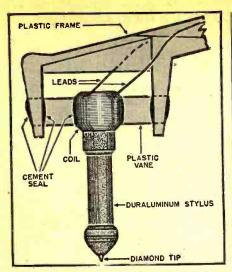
The Fairchild dynamic pickup. Enlarged view shows assembly of unit.
